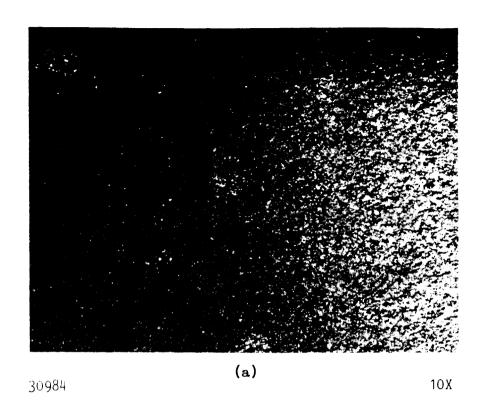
TYPICAL FG112 SPRAY SURFACE AFTER FATIGUE TESTING SPECIMEN NO. 17-1
